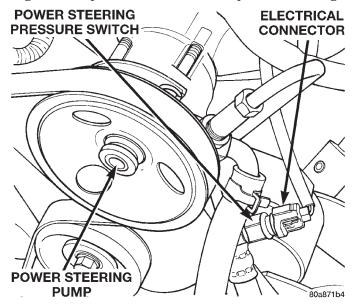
Power Steering Pump Pressure Switch—2.5L Engine
